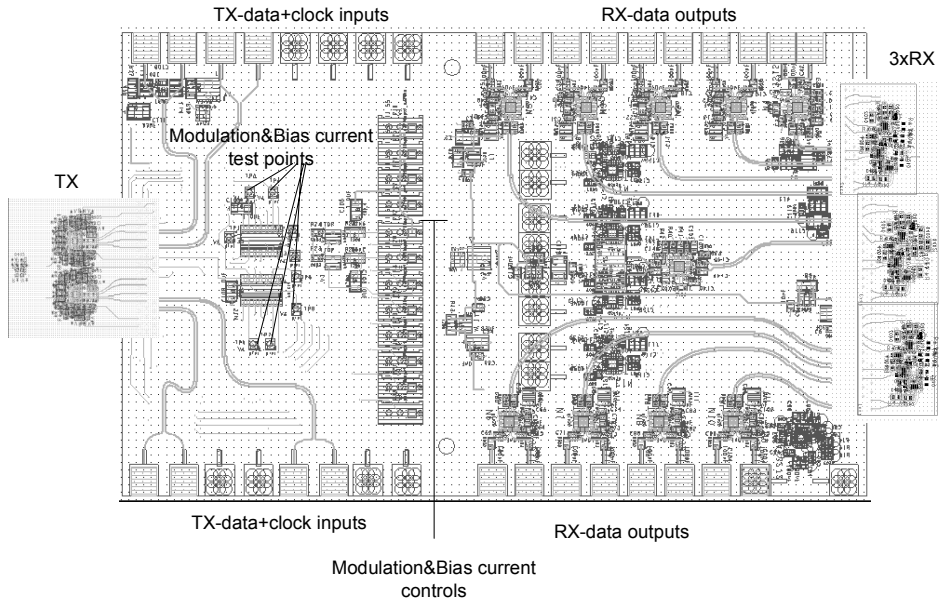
Layout design of the test assembly. The transmitter part with an optoelectronic front-end for one optical coupling scheme is on the left, and the receiver part with all three coupling schemes is on the right.
